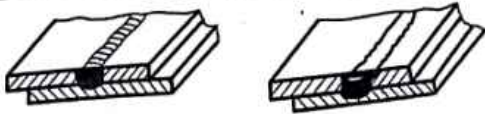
Preparation of plates for oxy-acetylene welding
